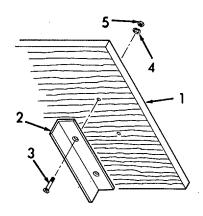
Clothing Sewing Machine Tray, Installation.
